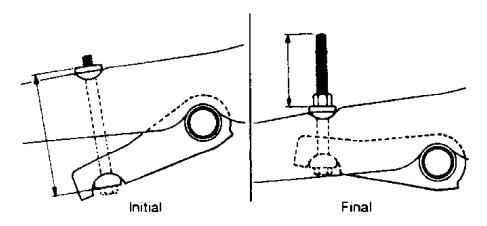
Adjusting Anchor Arm Bolt Courtesy of Mitsubishi Motor Sales of America.
